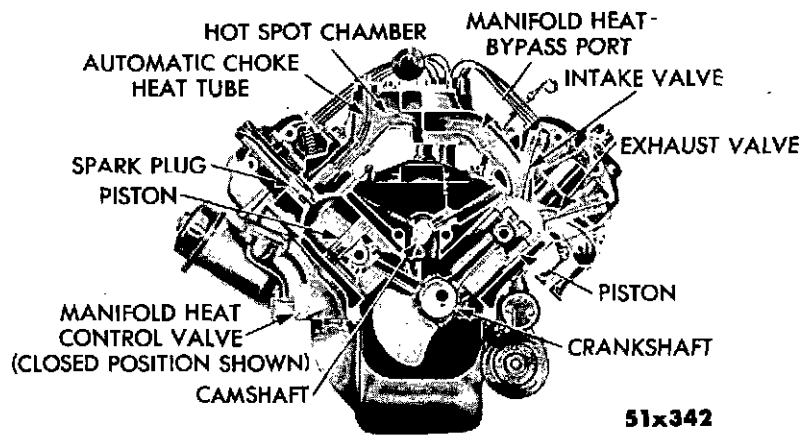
Chrysler V-8 Engine (Cutaway Sectional View)
